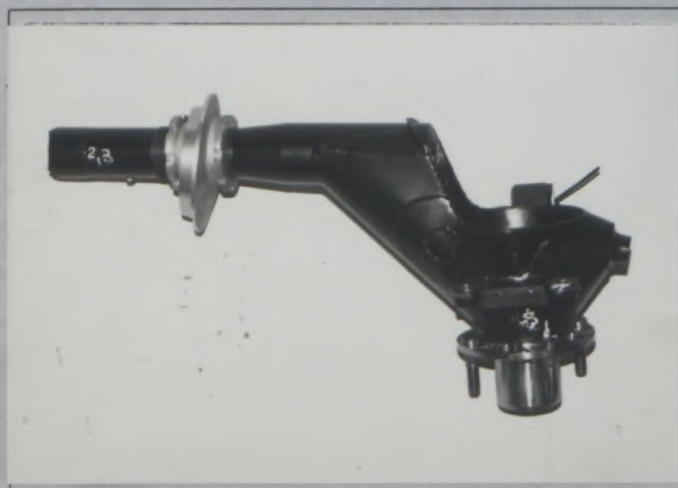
REINFORCED TOP MOUNT, TYPE A
